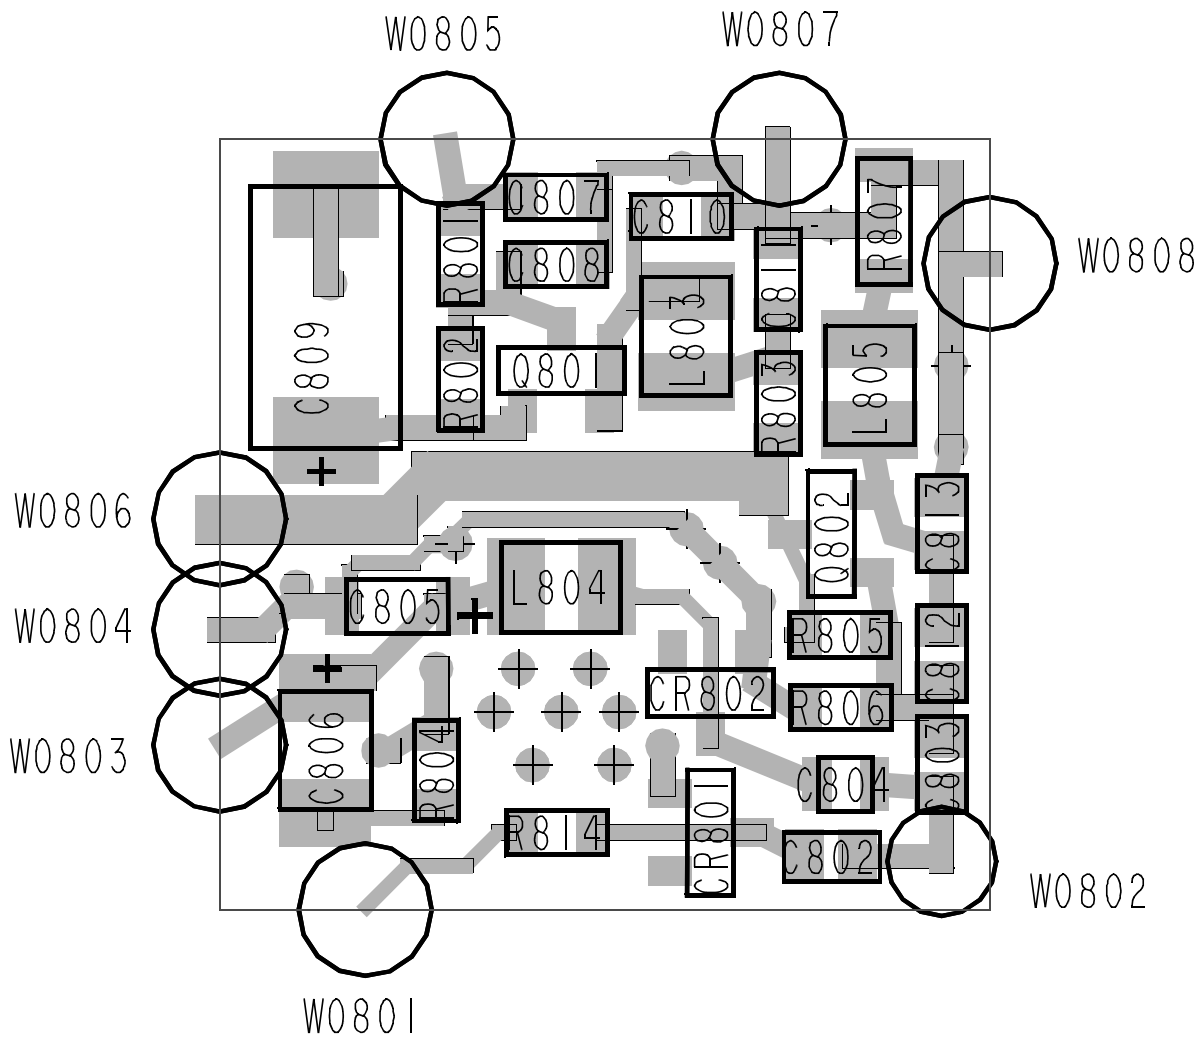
RECEIVE VCO COMPONENT LAYOUT
